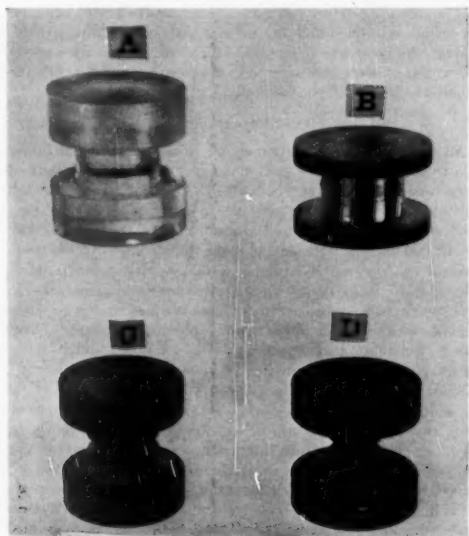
SPECIMENS FOR TENSILE-TYPE SHEAR TEST
